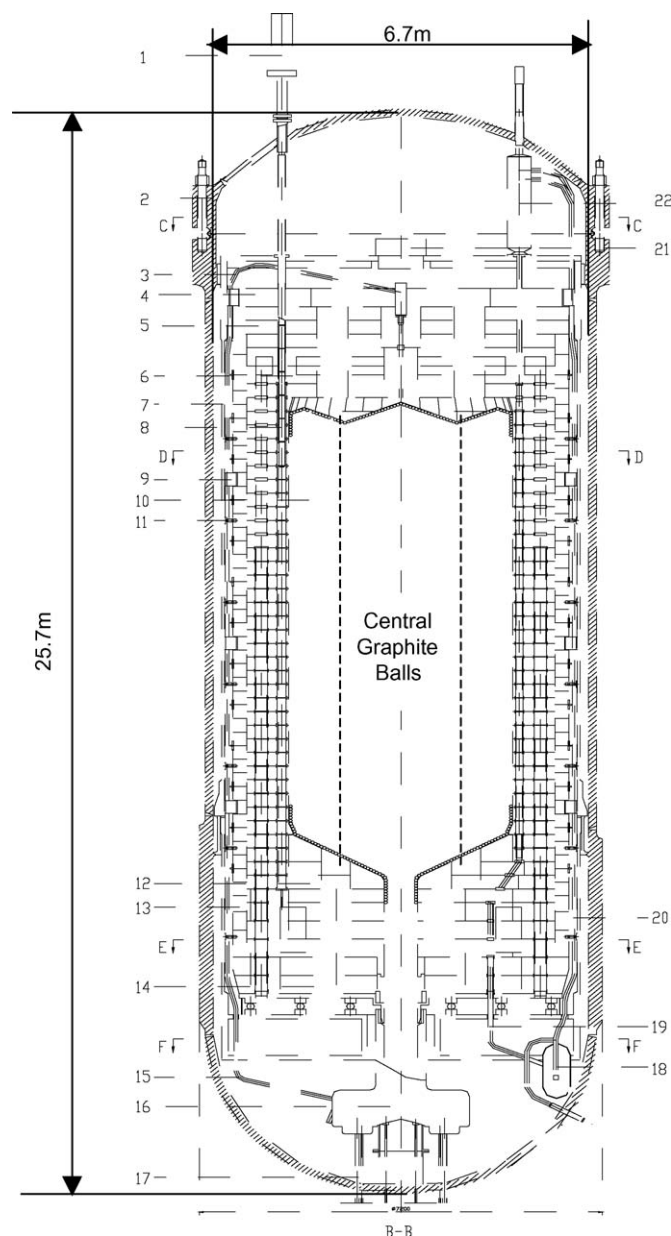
Vertical section of HTR-PM: (1) control rod drive mechanism; (2) reactor pressure vessel; (3) fuel charging tube; (4) kentledge; (5) top thermal insulator; (6) top reflector; (7) core vessel; (8) control rod guiding channel; (9) stop wing plate; (10) reactor core; (11) supporting spring; (12) bottom reflector; (13) side reflector; (14) bottom thermal insulator; (15) fuel ball lifting tube; (16) single-nozzle; (17) ball discharging tube; (18) absorbing ball storage tank; (19) absorbing ball loading tube; (20) absorbing ball gas-loading tube; (21) shielding plug; (22) top absorbing ball storage tank.
